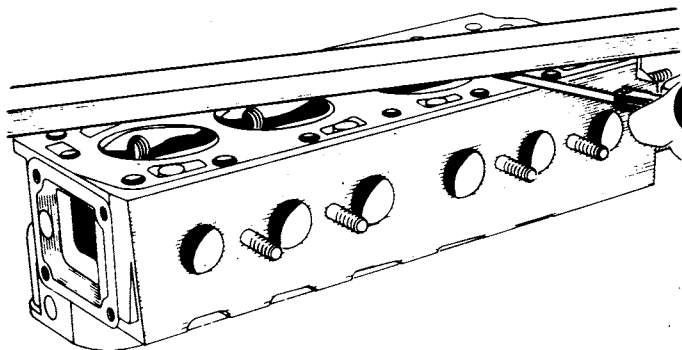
CHECKING CYLINDER HEAD FLATNESS
